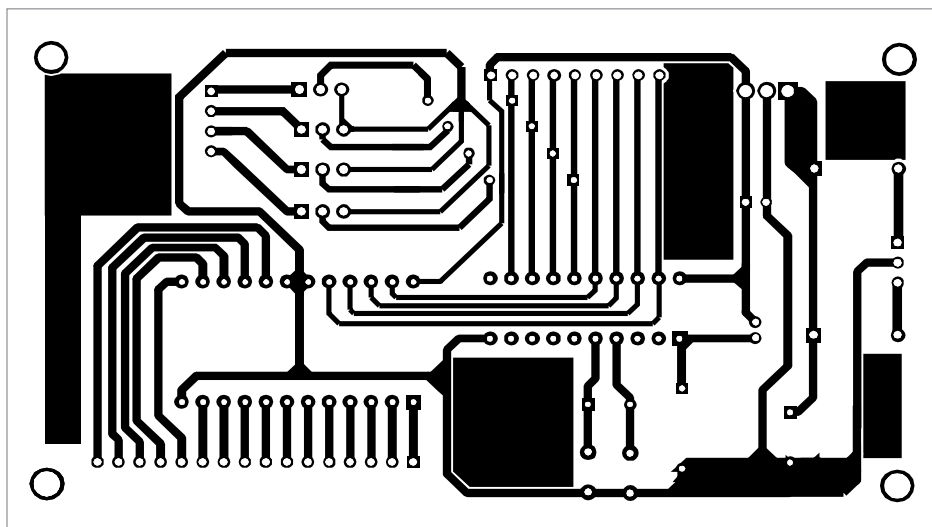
Actual-size PCB layout of the 4x4x4 LED cube
